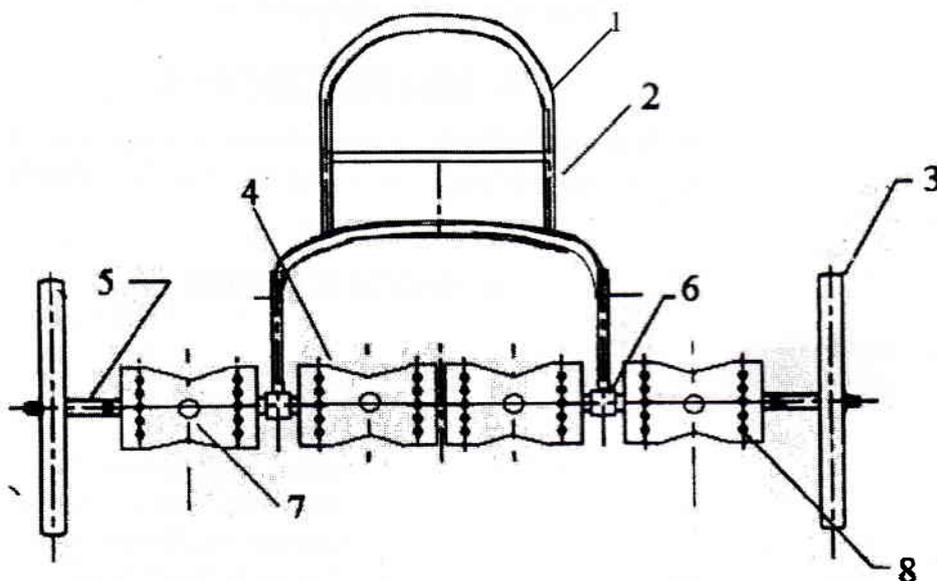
FIG.: CONSTRUCTIONAL DETAILS OF AGROTECH DRUM SEEDER
